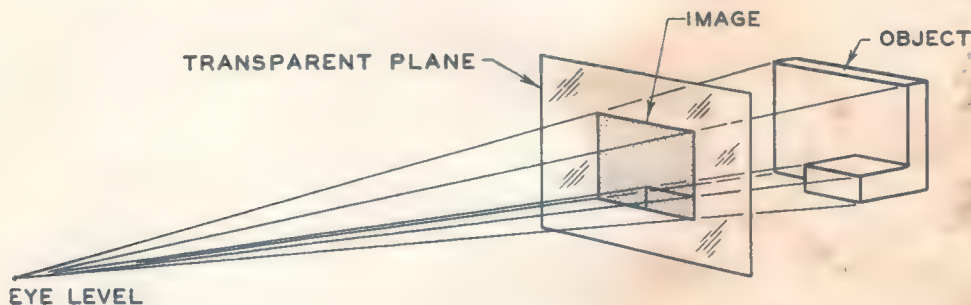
PROJECTING IMAGE FOR FRONT VIEW
